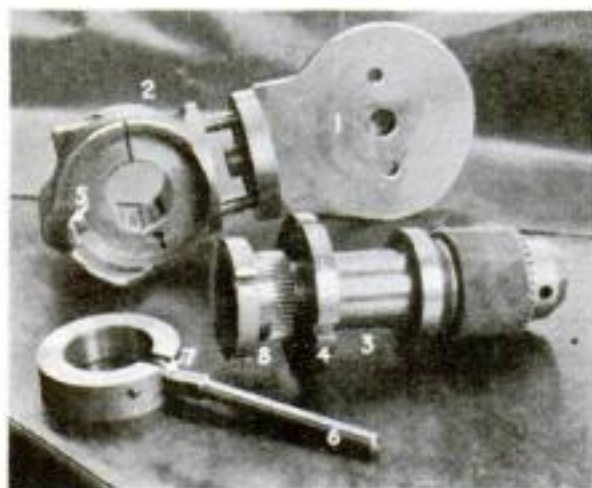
The chucking and spacing device dismantled to show construction of various parts.
